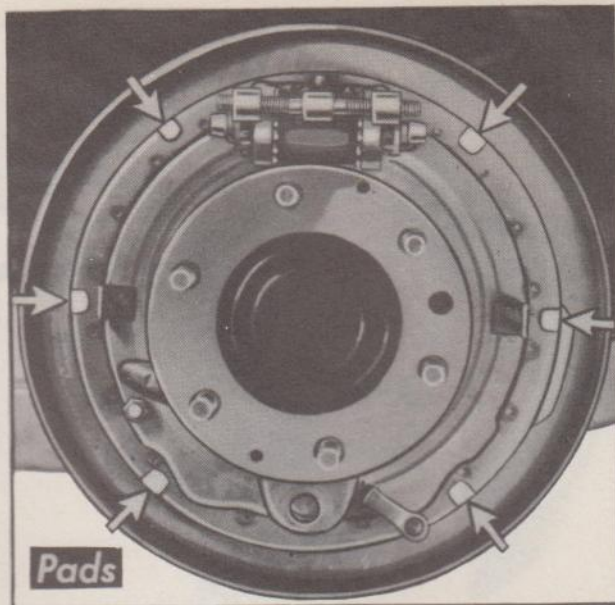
Checking Alignment of Brake Shoes with Flange Plate
